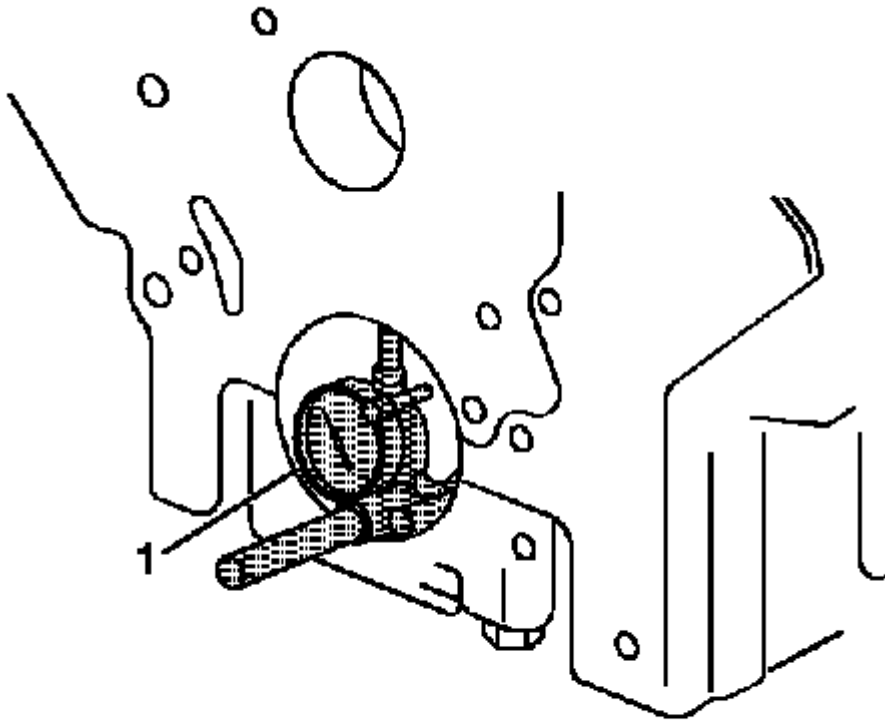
View of EN-8087 Gage To Measure Bearing Bore
